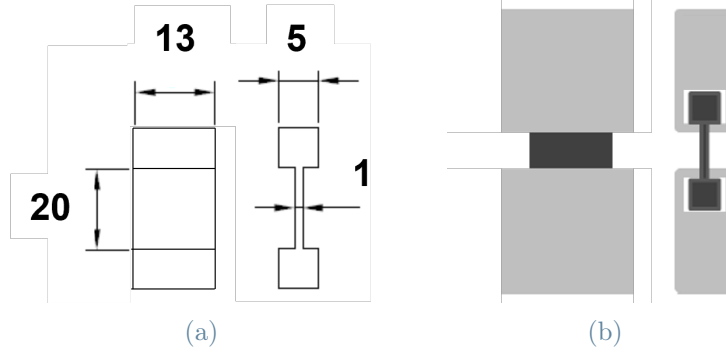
a) Geometry and dimensions of the strip specimen used. All dimensions in millimeters. b) Clamping system schematization.
